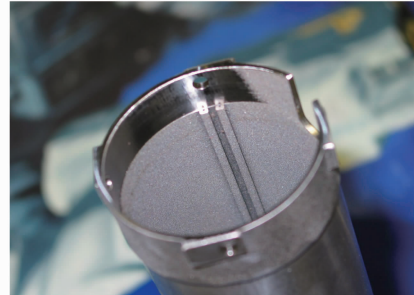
LC Ti-6Al-4V boom with a slot to hold electronic card, after final machining
